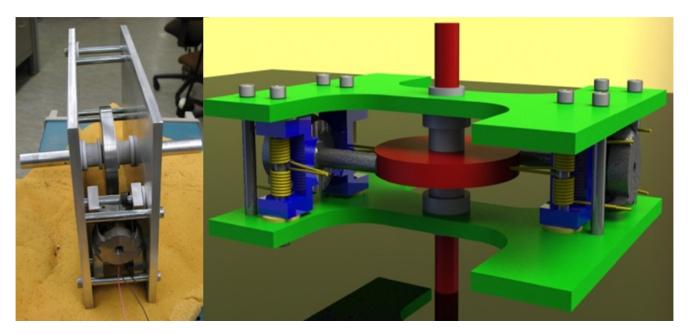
A CAD rendering and a photograph of an example of a Barth motor produced by mounting a flexure ultrasonic horn against a rotor. The high frequency horn impacts the rotor and produces a rotary motion.
